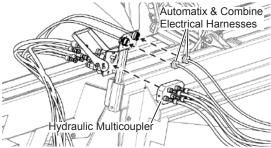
Connect Multicoupler & Electrical Harnesses
